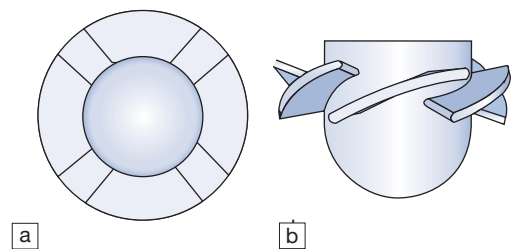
Design of six-vane impeller. (a) Top view, (b) side view.
